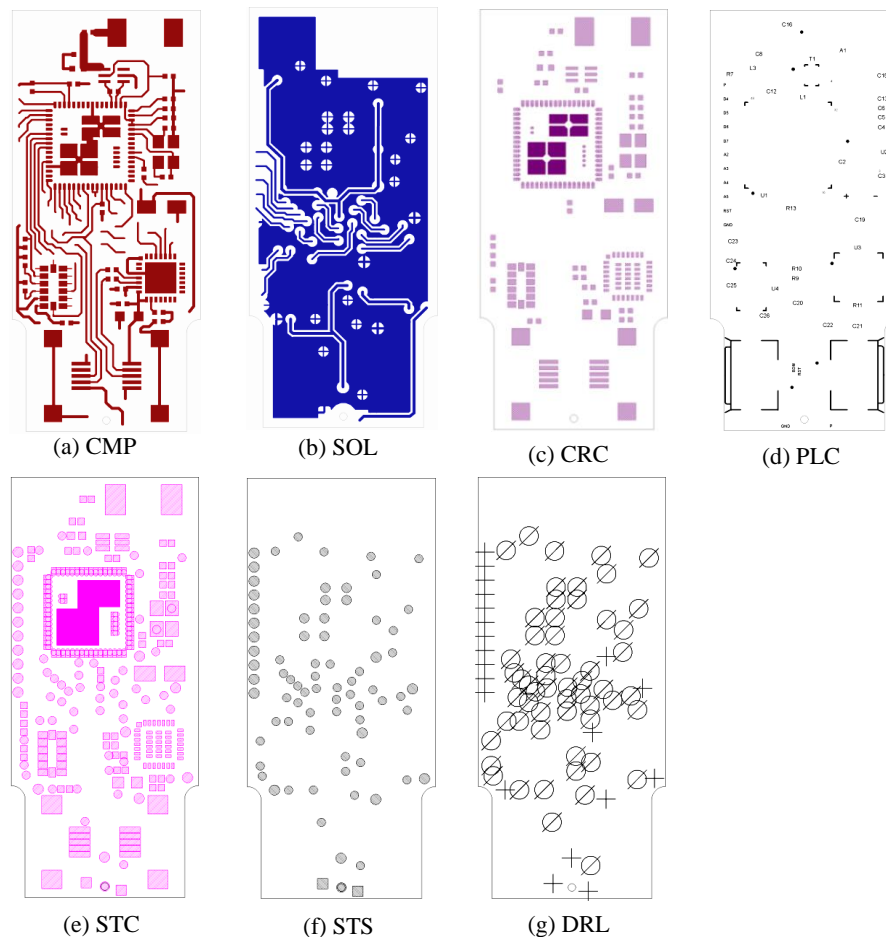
RF-control-board PCB design files (a) CMP (b) SOL (c) CRC (d) PLC (e) STC (f) STS (g) DRL
